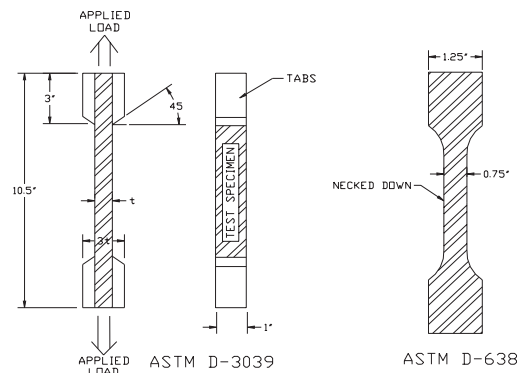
Test Specimen Configuration for ASTM D-3039 and D-638 Tensile Tests (Structural Composites, Inc.)
